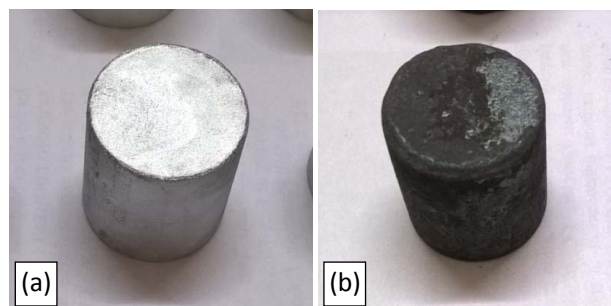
Cylindrical specimens: (a) aluminium-coated and (b) sintered
